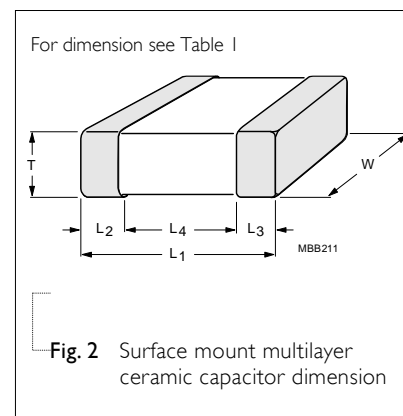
Surface mount multilayer ceramic capacitor dimension
